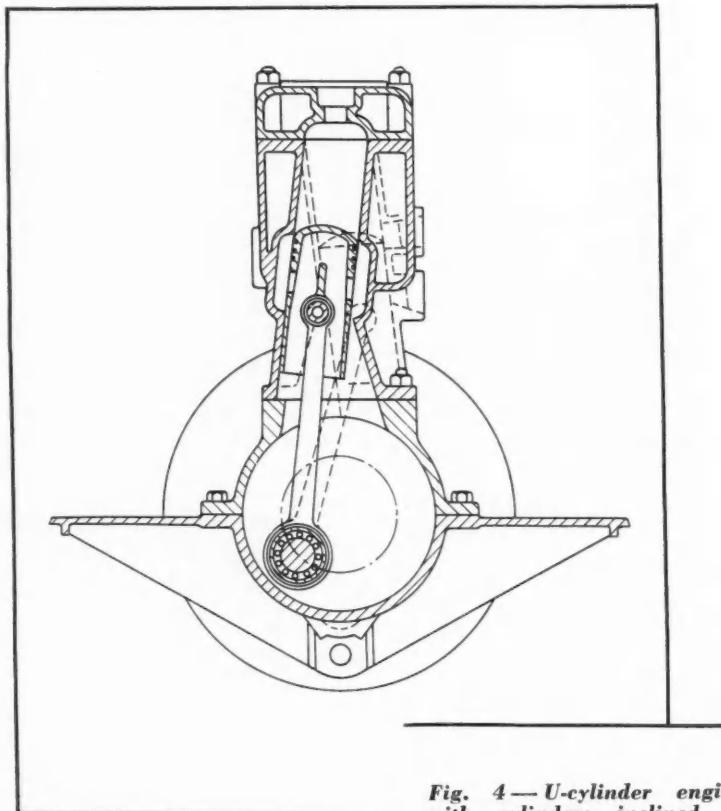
U-cylinder engine with cylinders inclined to plane through crankshaft axis
